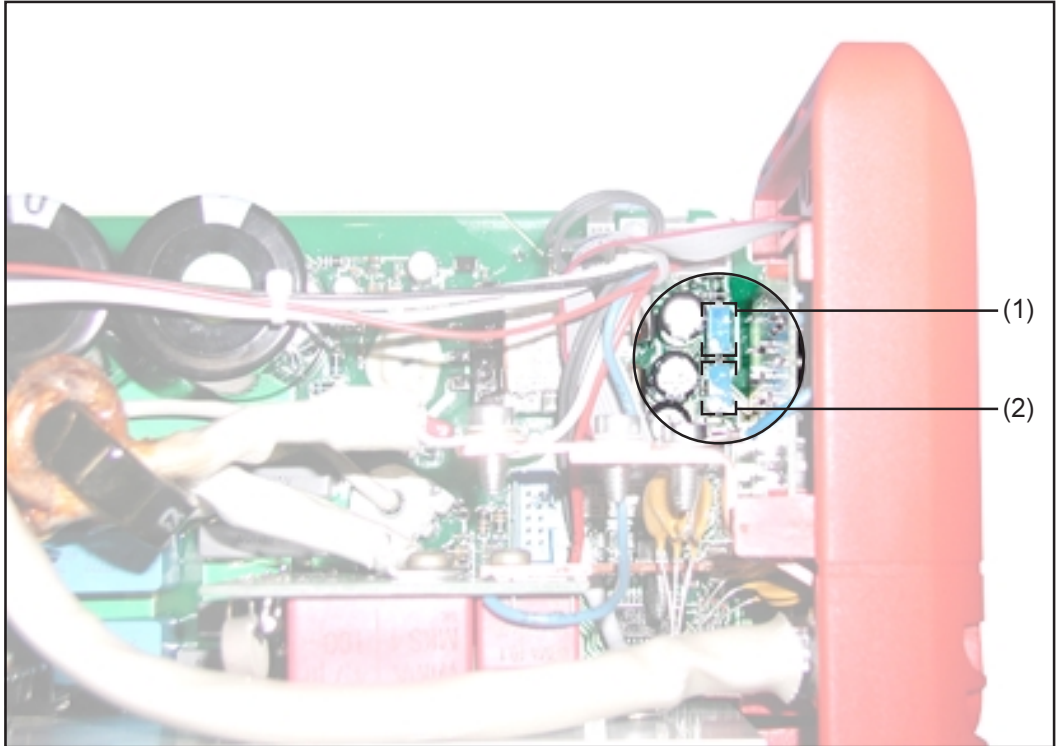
Potentiometer for setting the maximum welding amperage
